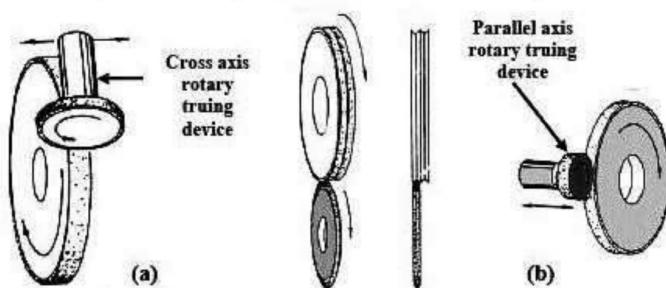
Rotary power truing wheel being used in (a) cross-axis (b) parallel-axis
